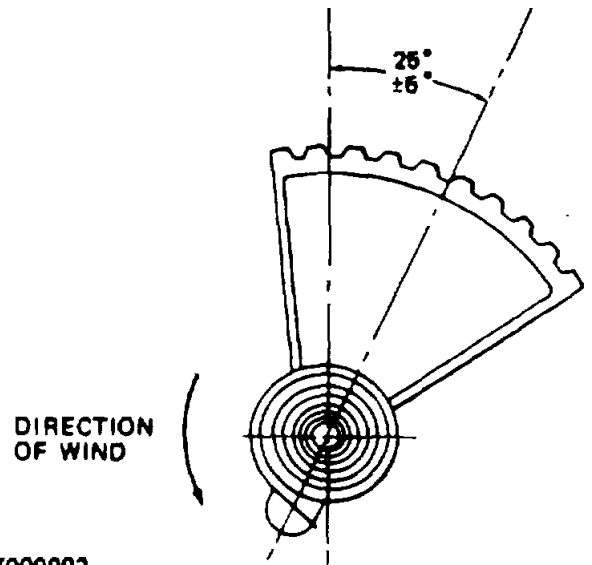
Direction of Hairspring on Rocking Shaft.
